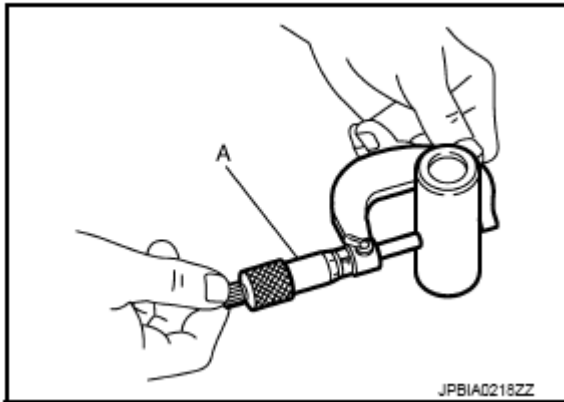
Measuring Outer Diameter Of Piston Pin Using Micrometer
